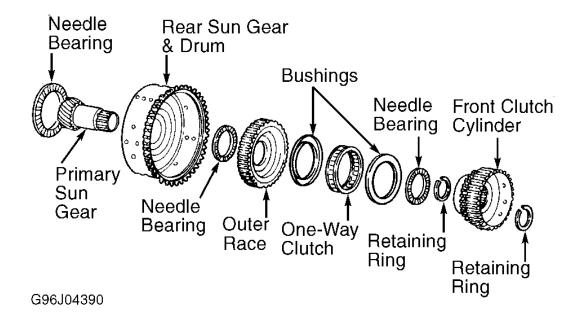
Exploded View Of Primary Sun Gear & One-Way (Sprag) Clutch Courtesy of FORD MOTOR CO.
